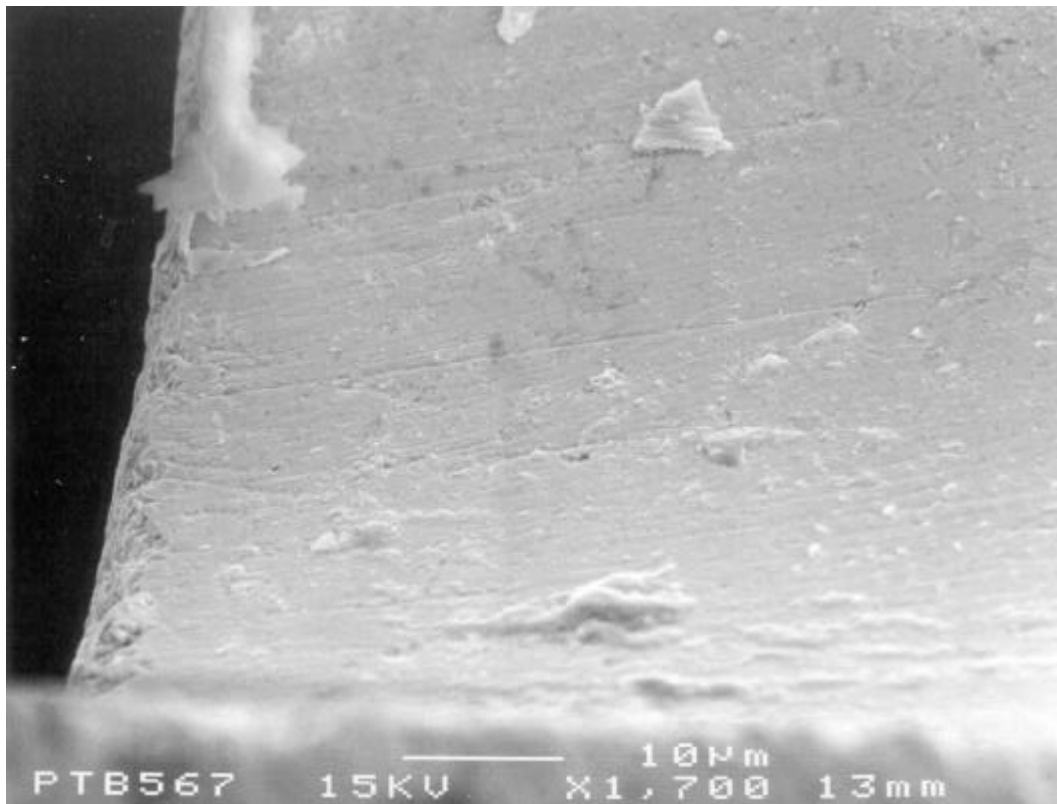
REM shot of a cut ring gauge (0,2 mm in diameter), detail
